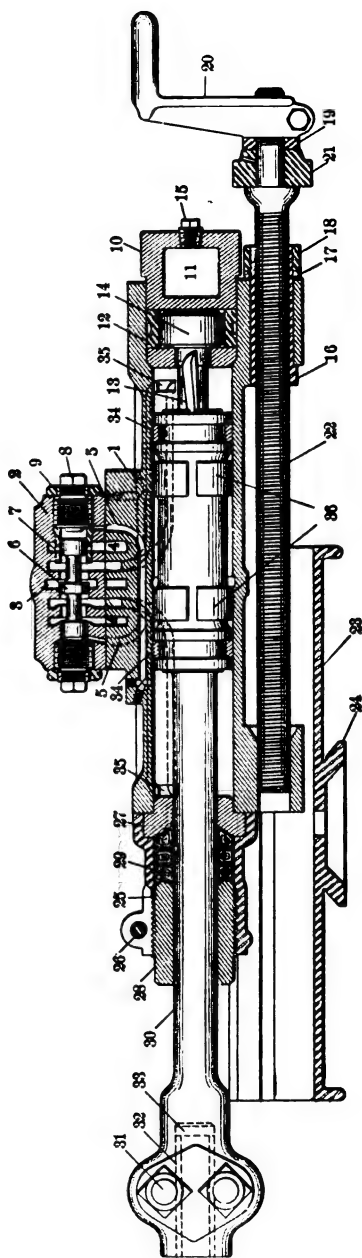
Sullivan "Differential" Drill (for Steam).
